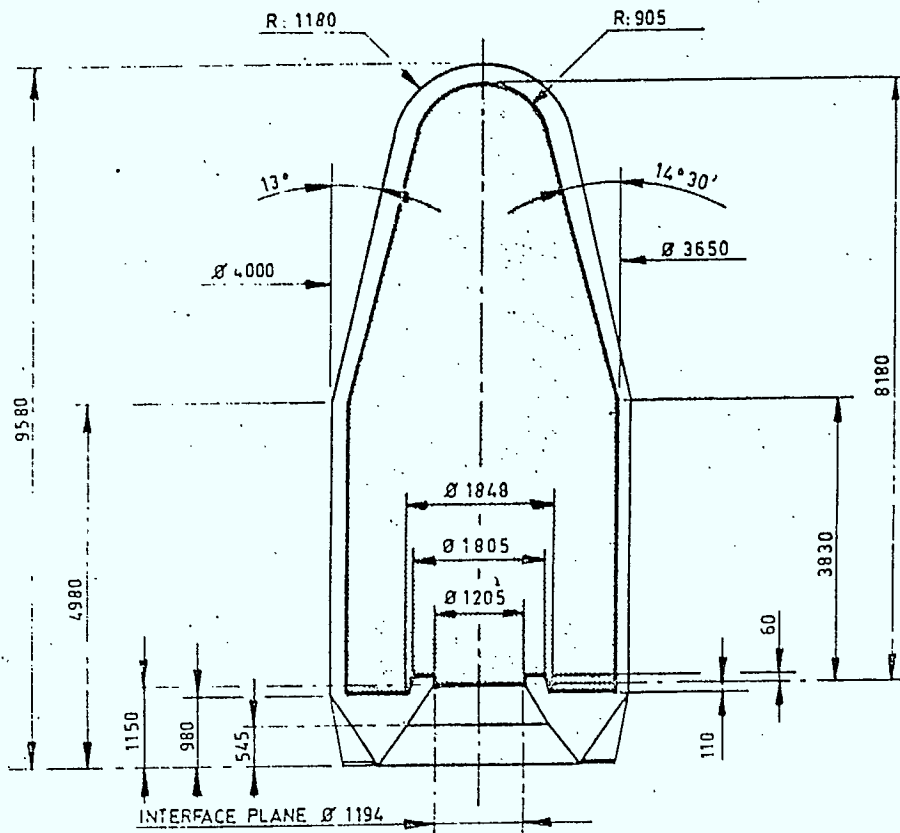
Dedicated Launch Short Fairing Envelope with Adapter 1194
